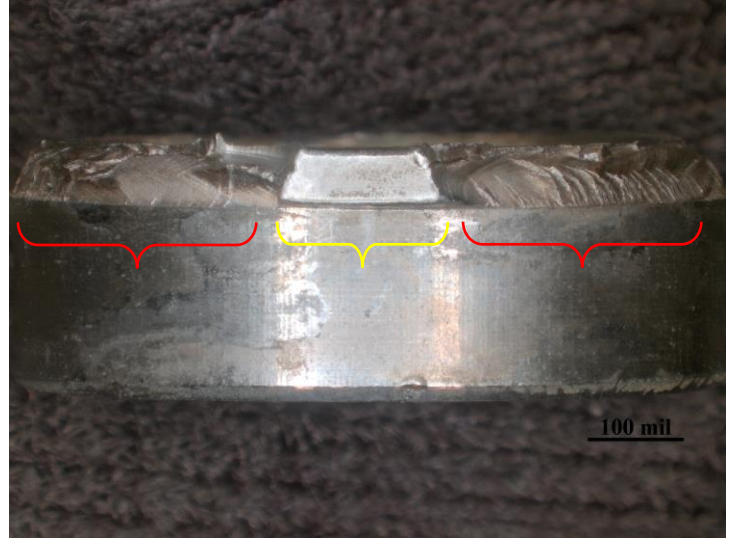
Photo of Failed Engine Cowling Bushing. Fatigue fracture zone in red, unfractured zone in yellow.
